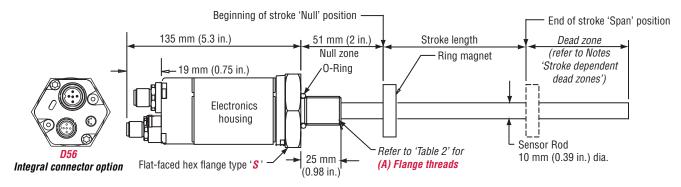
Model RH Rod-style sensor dimension reference (shown with D56 integral connector options)
